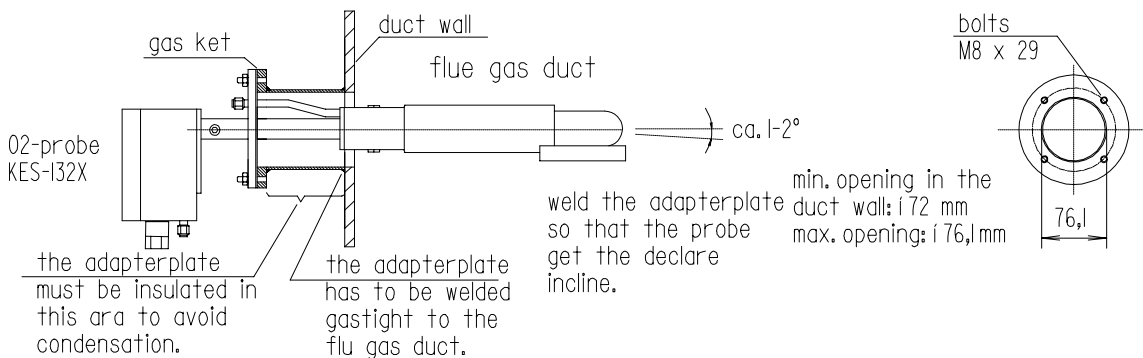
Mounting dimensions of the O₂ probe KES-132x with ASR-1320
